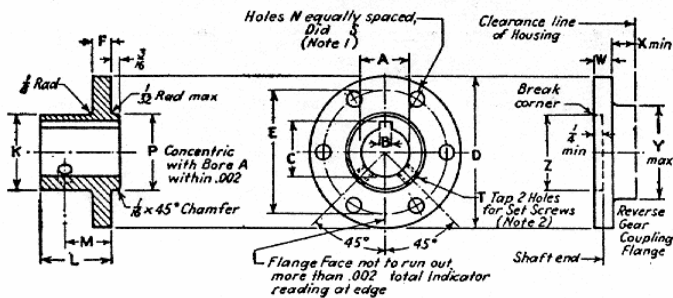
TYPE II PROPELLER-SHAFT COUPLING, EXTERNAL PILOT, STRAIGHT BORE
